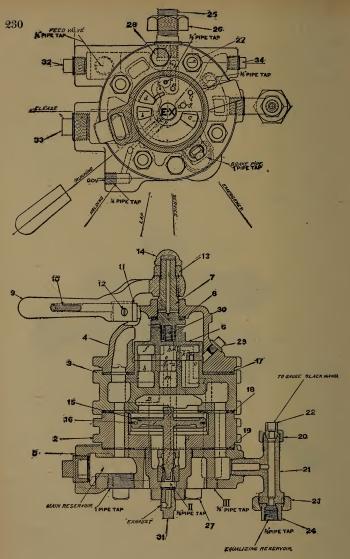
H-6 Automatic Brake Valve, Sectional View. No. 2.
